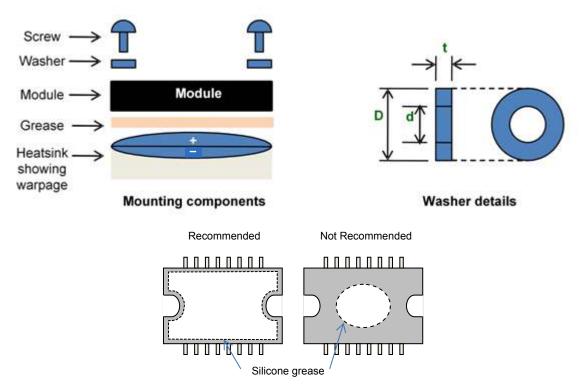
Module Mounting details : components ; washer drawing ; need for even spreading of thermal grease
